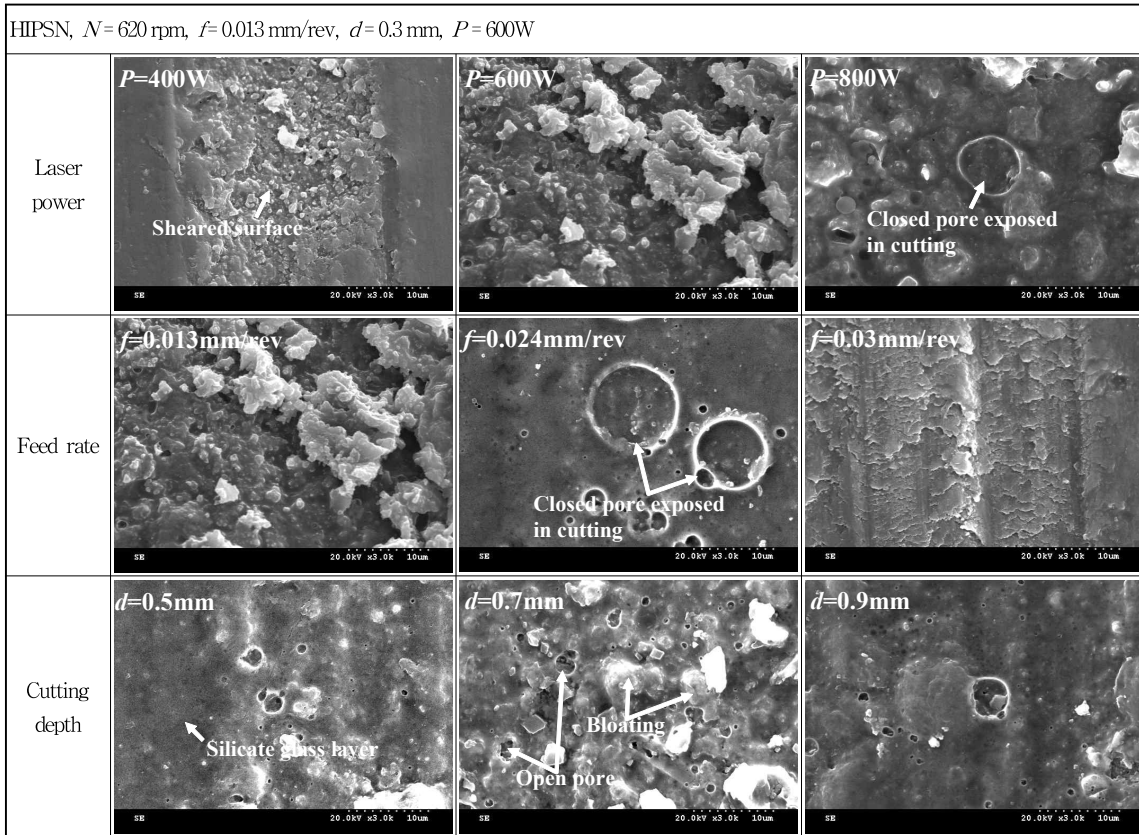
SEM images of machined HIPSN surface with machining parameter
